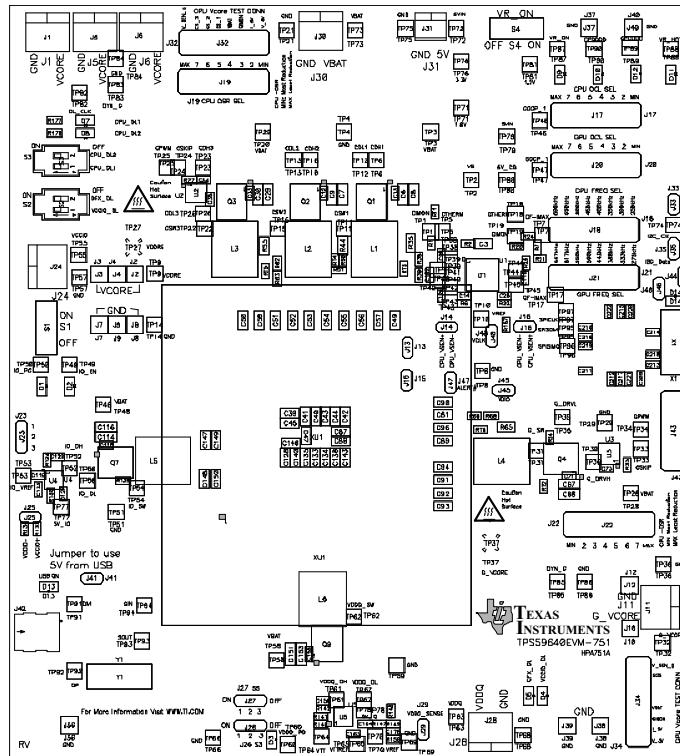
TPS59640EVM-751 Top Layer Assembly Drawing (Top View)
